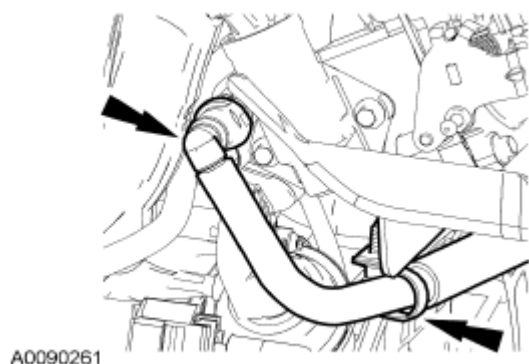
Locating Fuel Vapor Return Tube & Retainer
